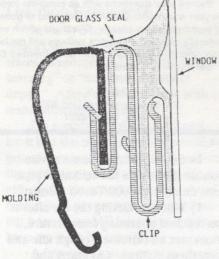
Cross section showing correct assembly of door glass seal molding.
